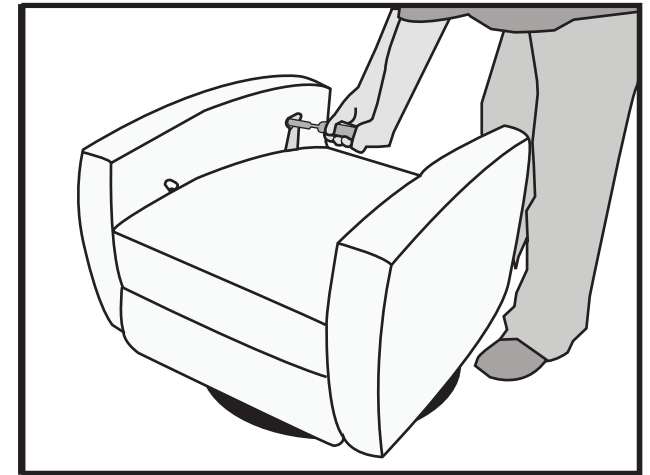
Remove the bolts with a 7/16" socket and ratchet. There are two bolts on each arm mounting the mechanism to the inside arms.
